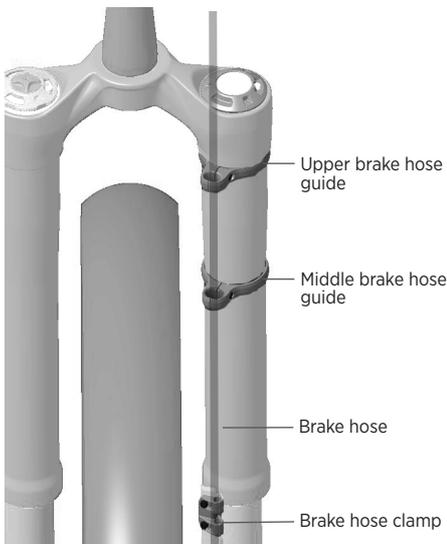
Full view of brake hose routing through brake hose guides and into mast
